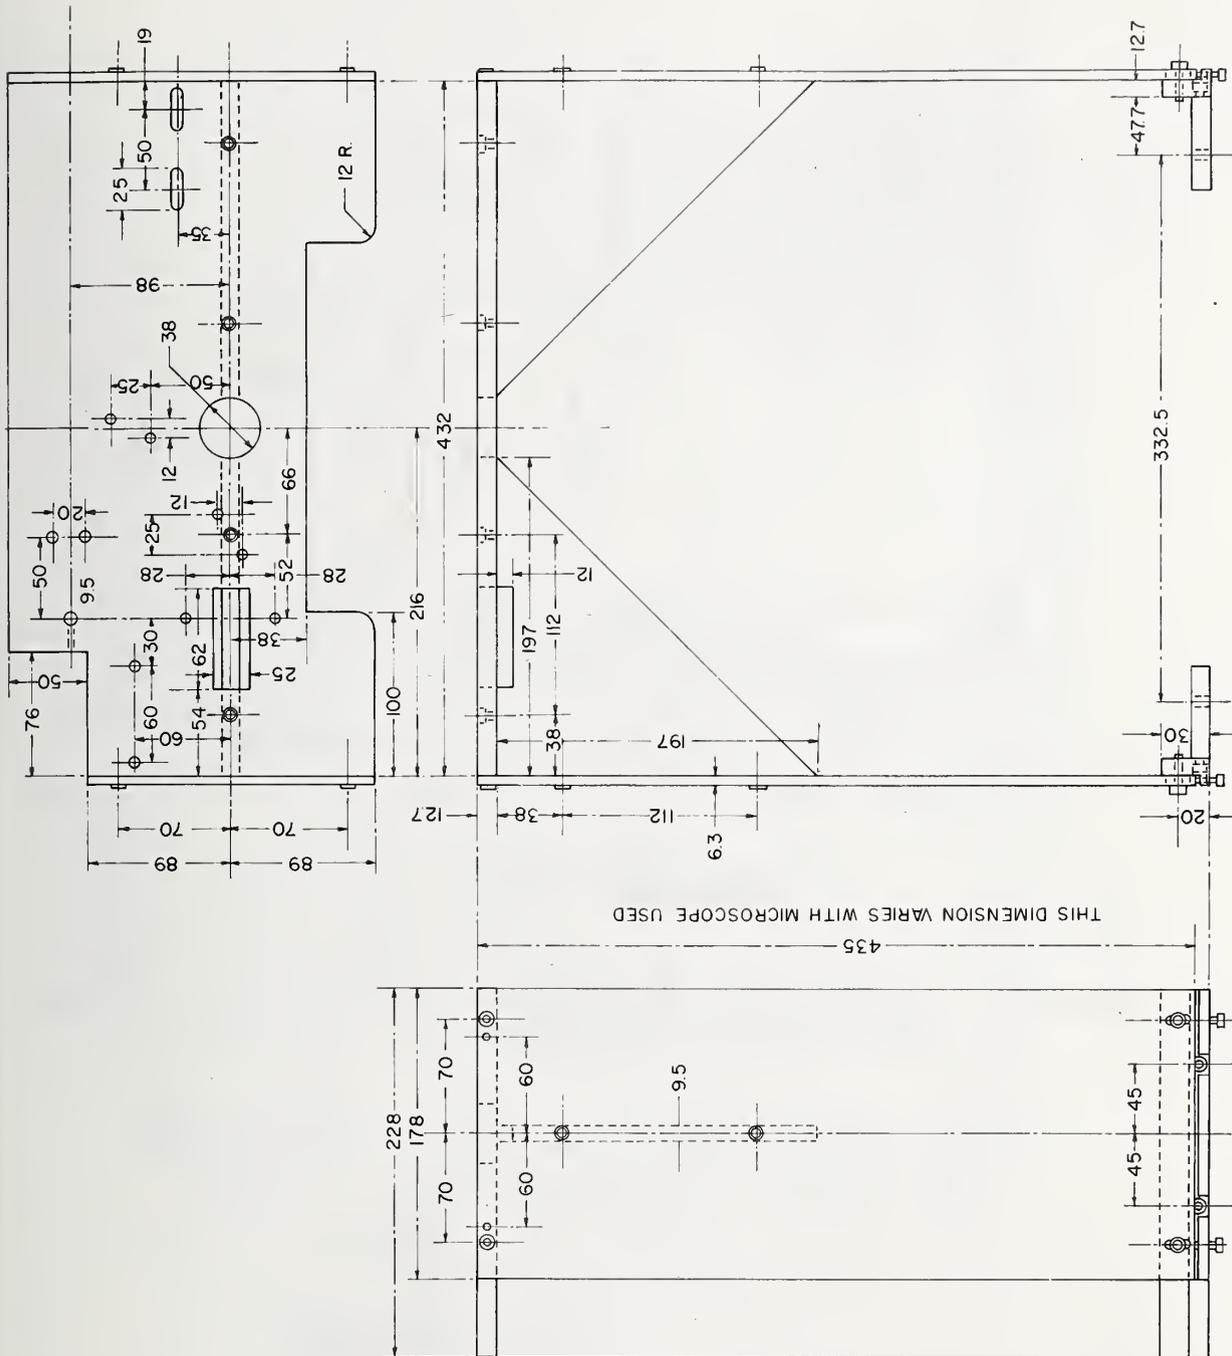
Mechanical drawing of the support frame. Dimensions are given in millimeters.
